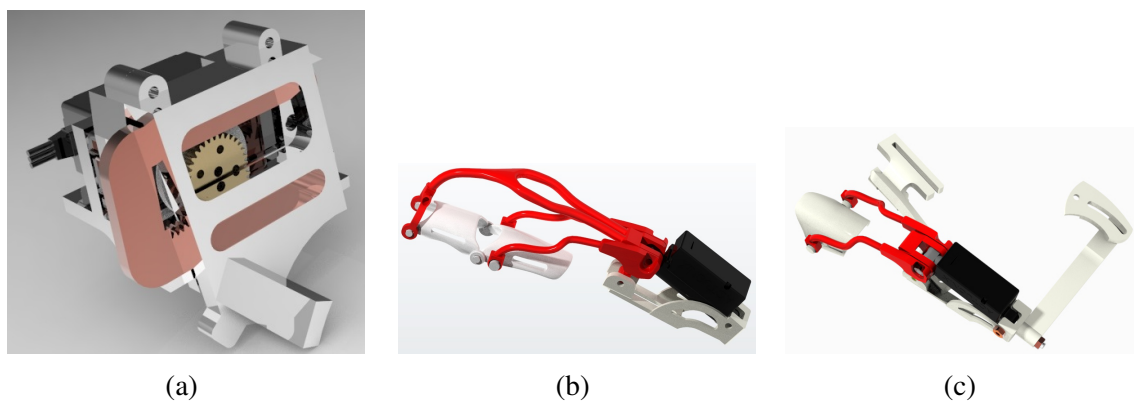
(a) The rack and pinion mechanism used for ensuring a tight closure saving batteries lifetime. (b) CAD model of single finger part. (c) CAD model of thumb part.
